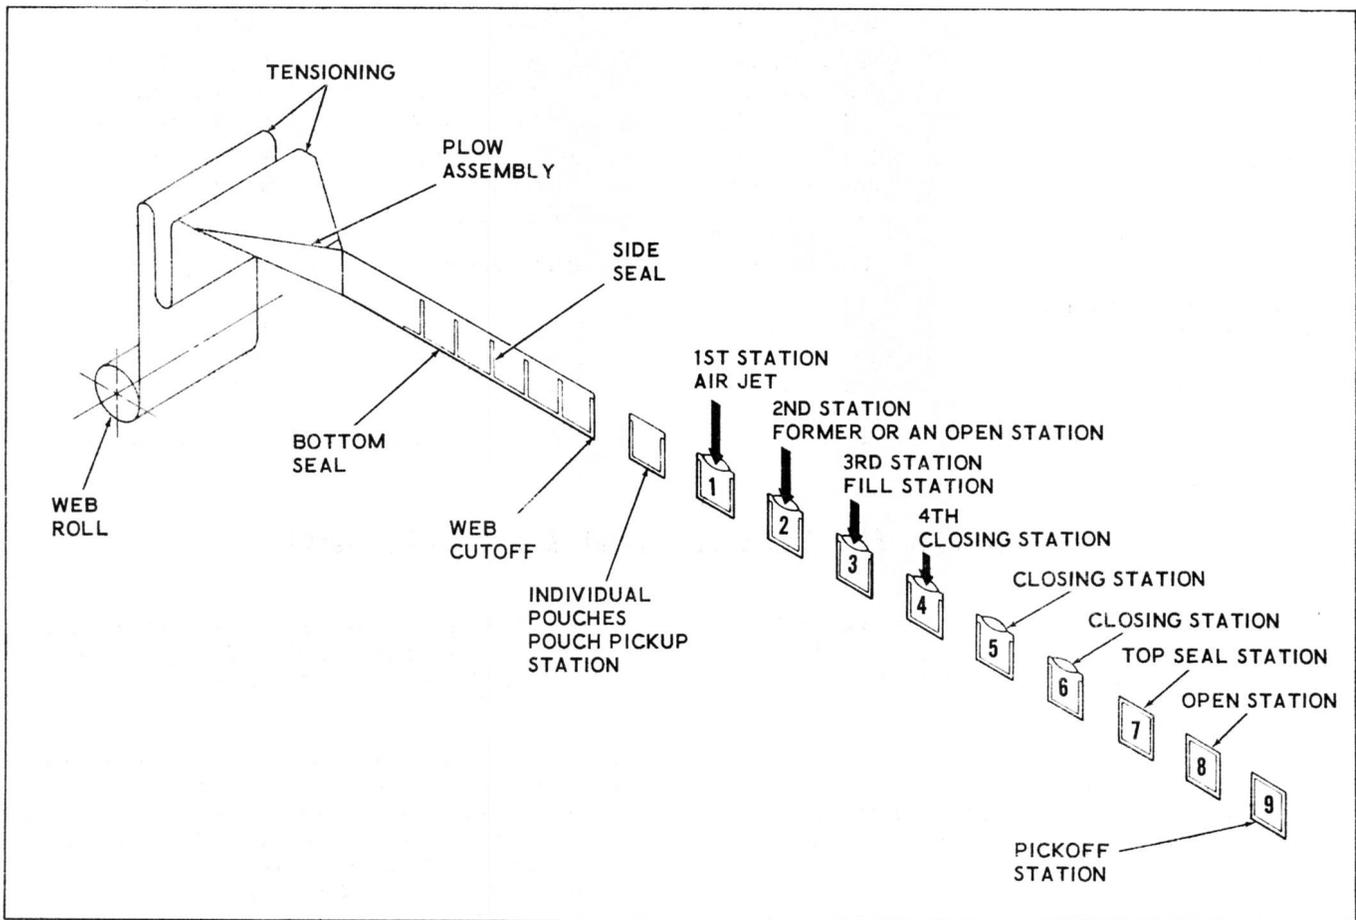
Typical Pouch Forming, Filling, Closing and Sealing Flow Chart
